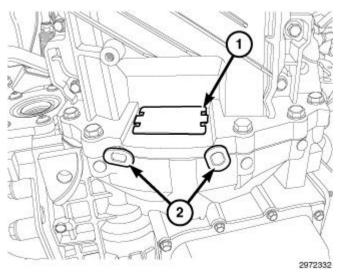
Rear Engine Mount Bracket & Bolts Courtesy of CHRYSLER GROUP, LLC
